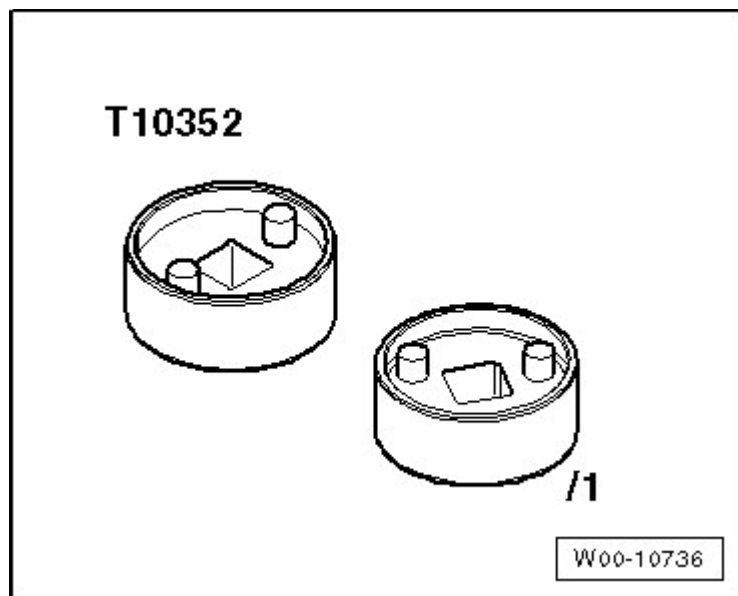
Identifying Assembly Tool T10352 And Assembly Tool T10352/1
